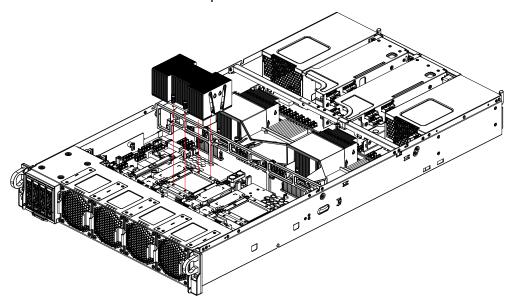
Installing GPU Heatsinks (screw locations shown))
